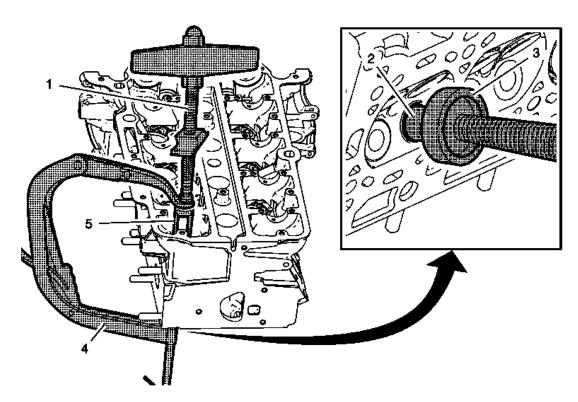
Valve Spring Compressor And Adapter Assembly Courtesy of GENERAL MOTORS COMPANY
